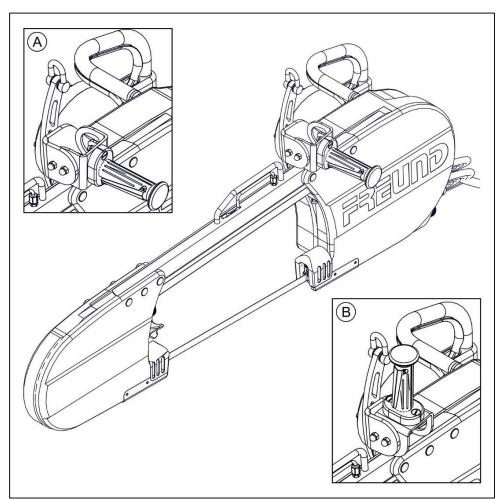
View of SB46-24 with details of the adjustable alignment of the handle (A), (B)
